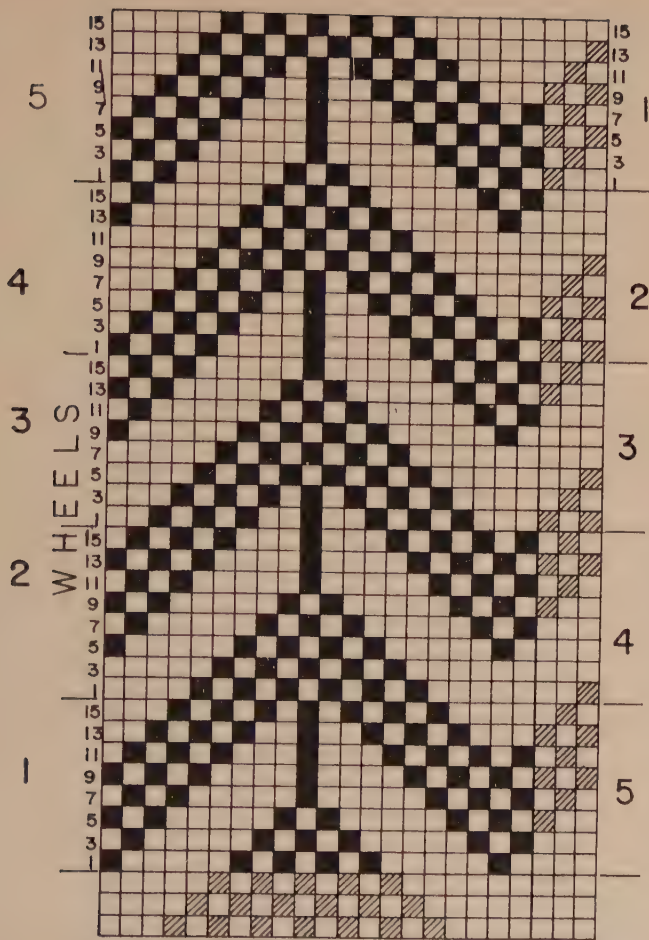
Twenty by 40 needle pattern for 24-feed machine; 720 needles, 100-cut wheels. Also 680-needle cylinder and 100-cut wheels, reading from top down.
